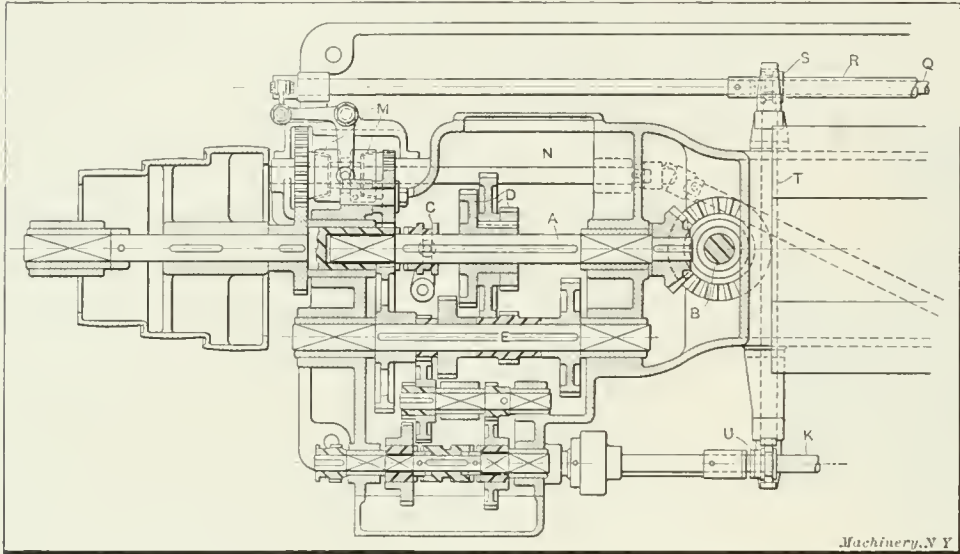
Section through Column in Horizontal Plane, showing Change-gear Mechanism
